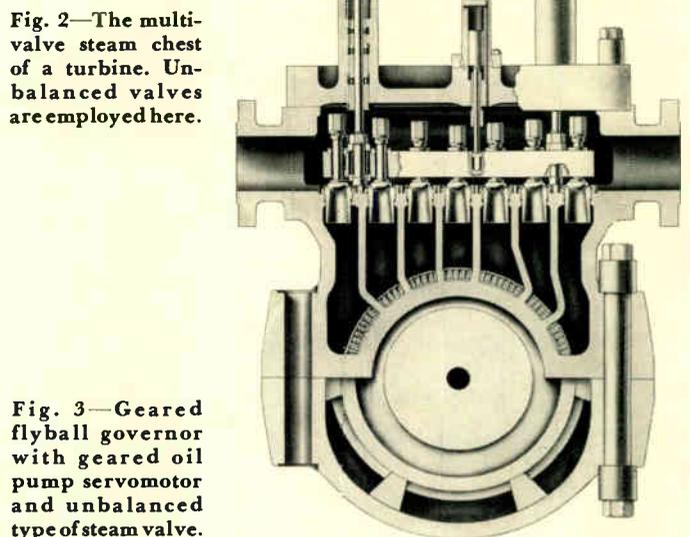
The multi-valve steam chest of a turbine. Unbalanced valves are employed here.
